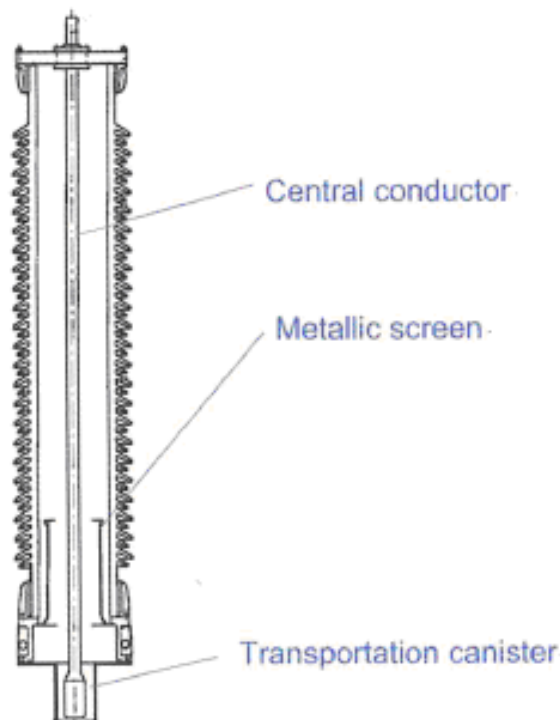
An Open Type of Gas - Filled Bushing.
